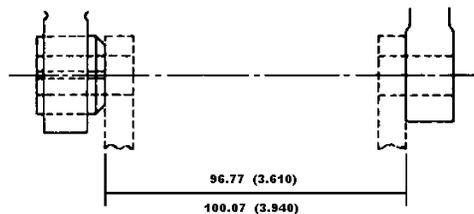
TYPICAL INSTALLATION OF SPLIT BUSHING IN HINGE MOUNTING LUG
